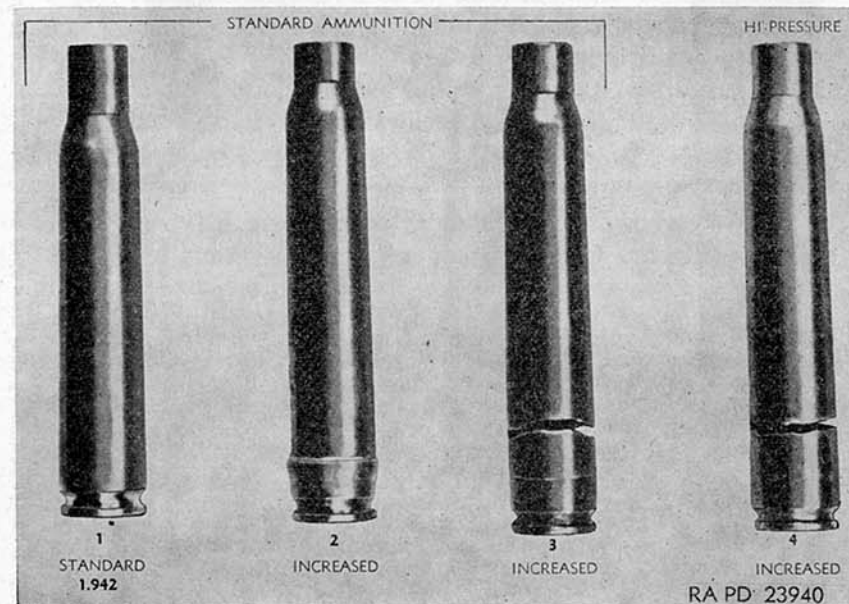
Effects of excessive head space on cartridge cases, cal.30 machine gun.
